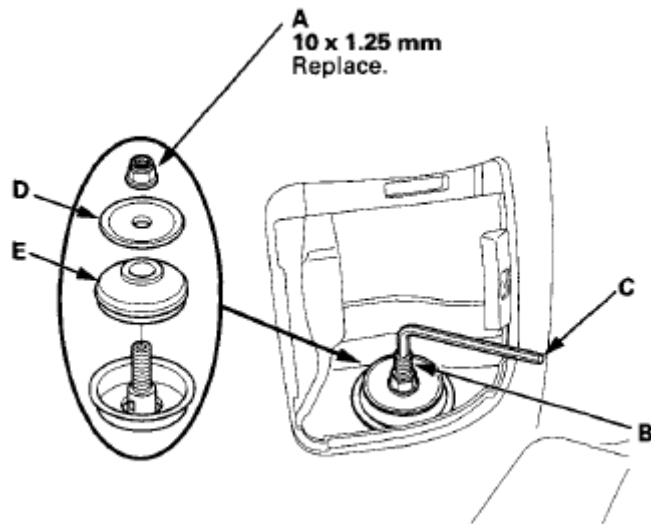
Removing Self-Locking Nut While Holding Damper Shaft With Hex Wrench
